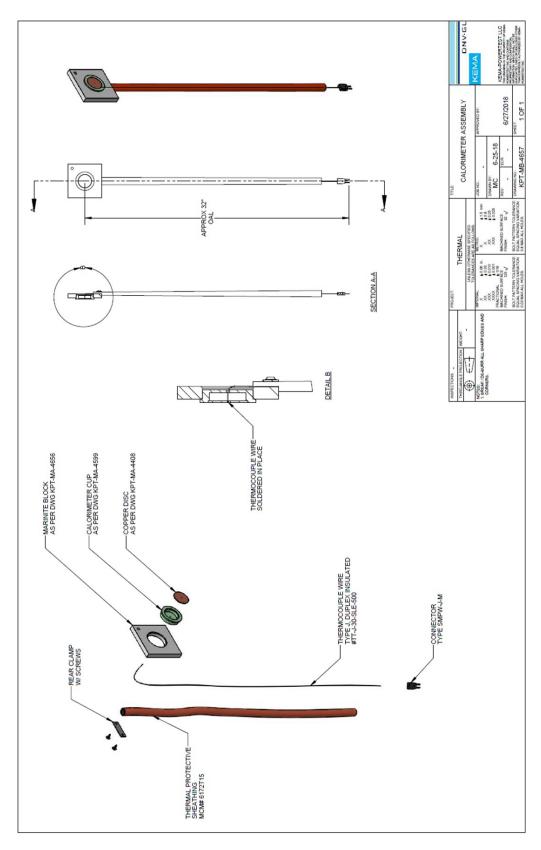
Drawing KPT-MB-4657, ASTM Calorimeter Assembly.
